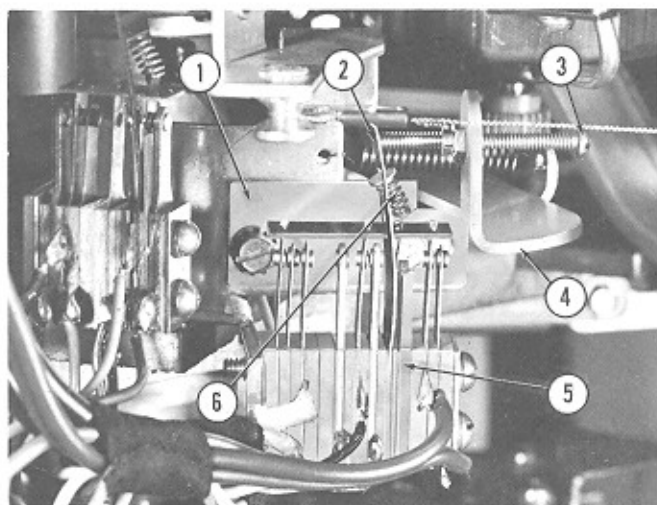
MUTE AND PLAY SWITCH ADJUSTMENT
